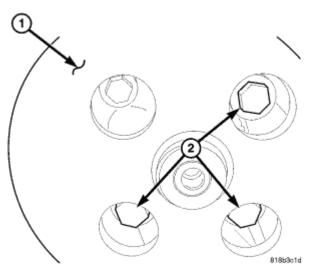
Power Steering Pump Bolts Courtesy of CHRYSLER LLC
